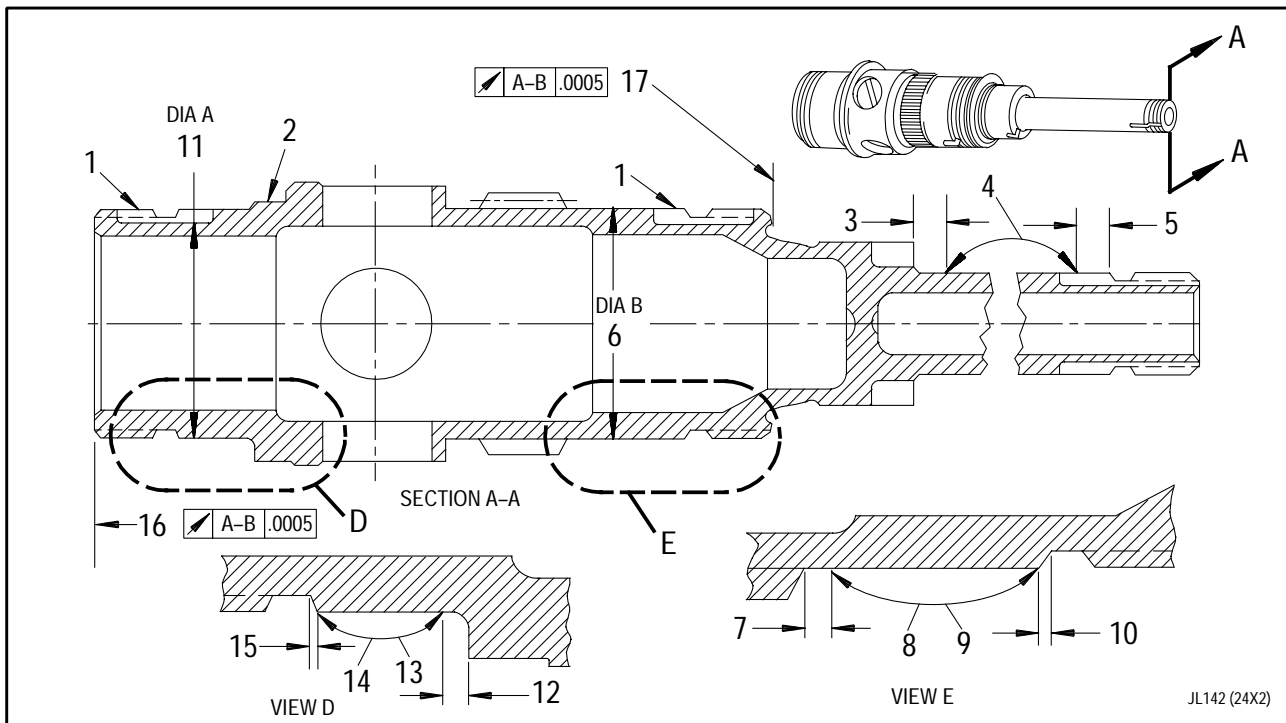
Gearbox Deaerator Impeller Shaft - Plating Repair
